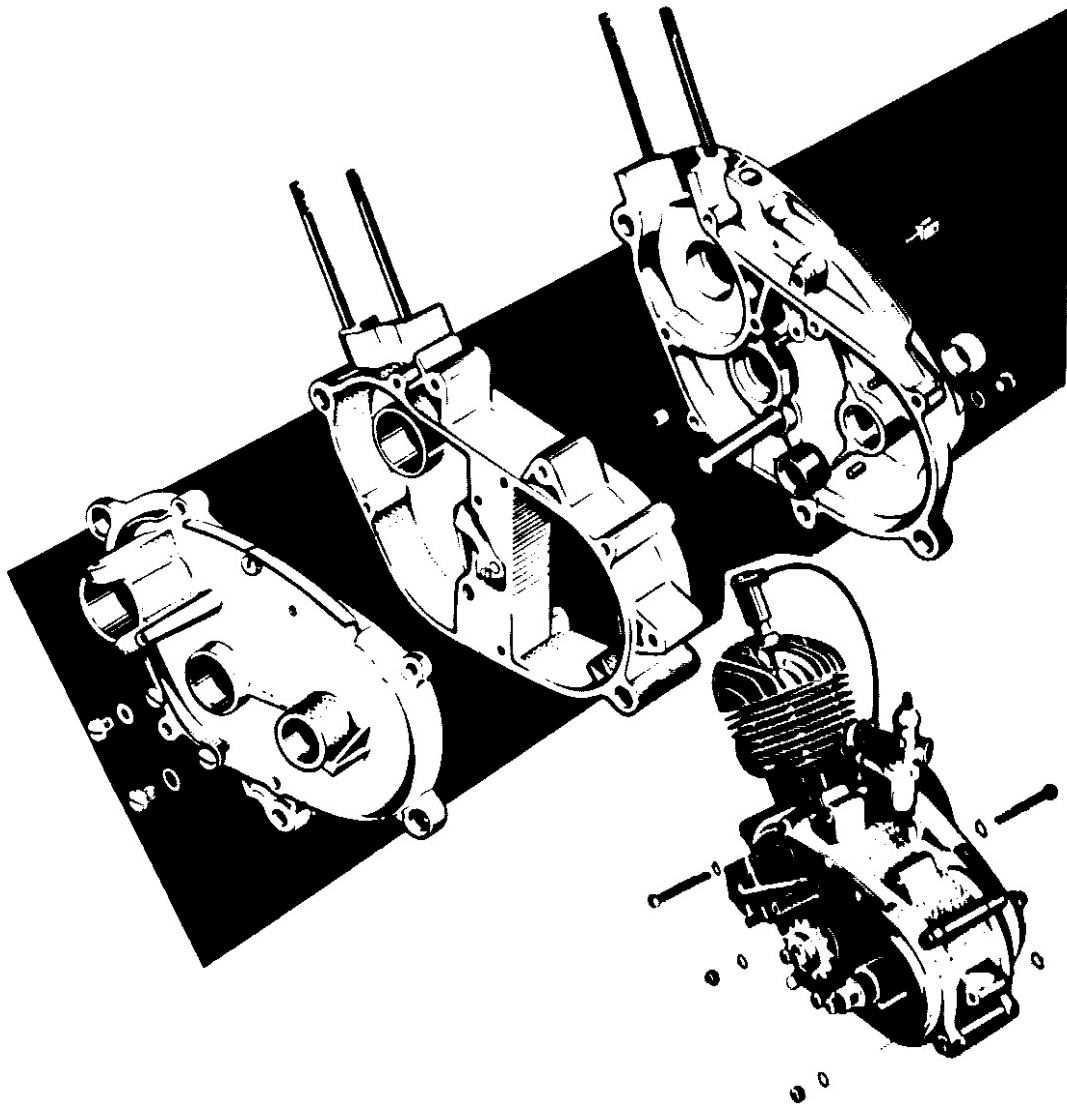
CRANKCASE COMPONENTS ASSEMBLED AND EXPLODED
